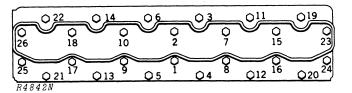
Cylinder Head Cap Screw Tightening Sequence
